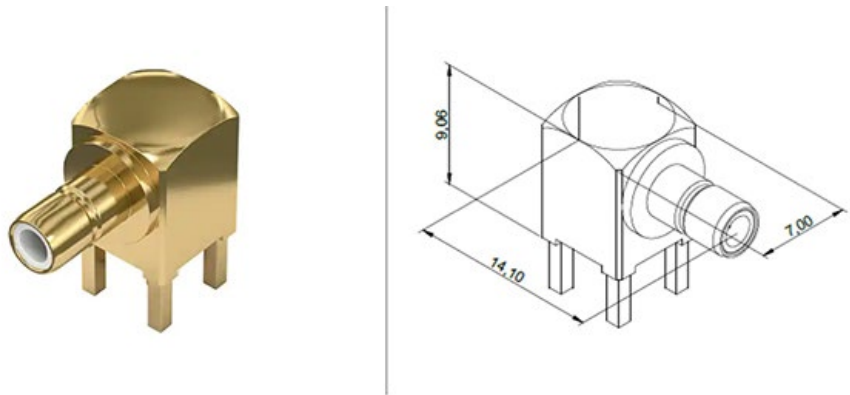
The 61611002121501 SMB connector is a snap-on right angle unit designed for through-hole board attachment and soldering, which is smaller than the SMA unit but has comparable specifications. (Image source: Würth Elektronik)
